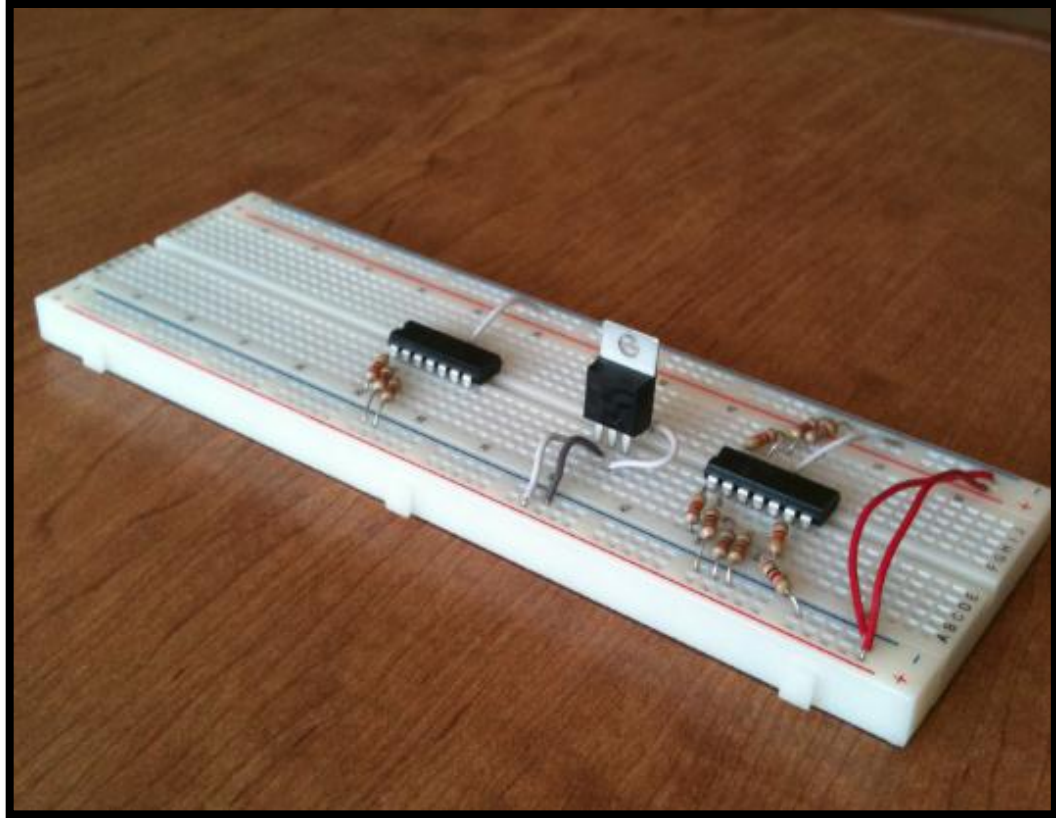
Side view of assembly step 2 for bread board circuit configuration
